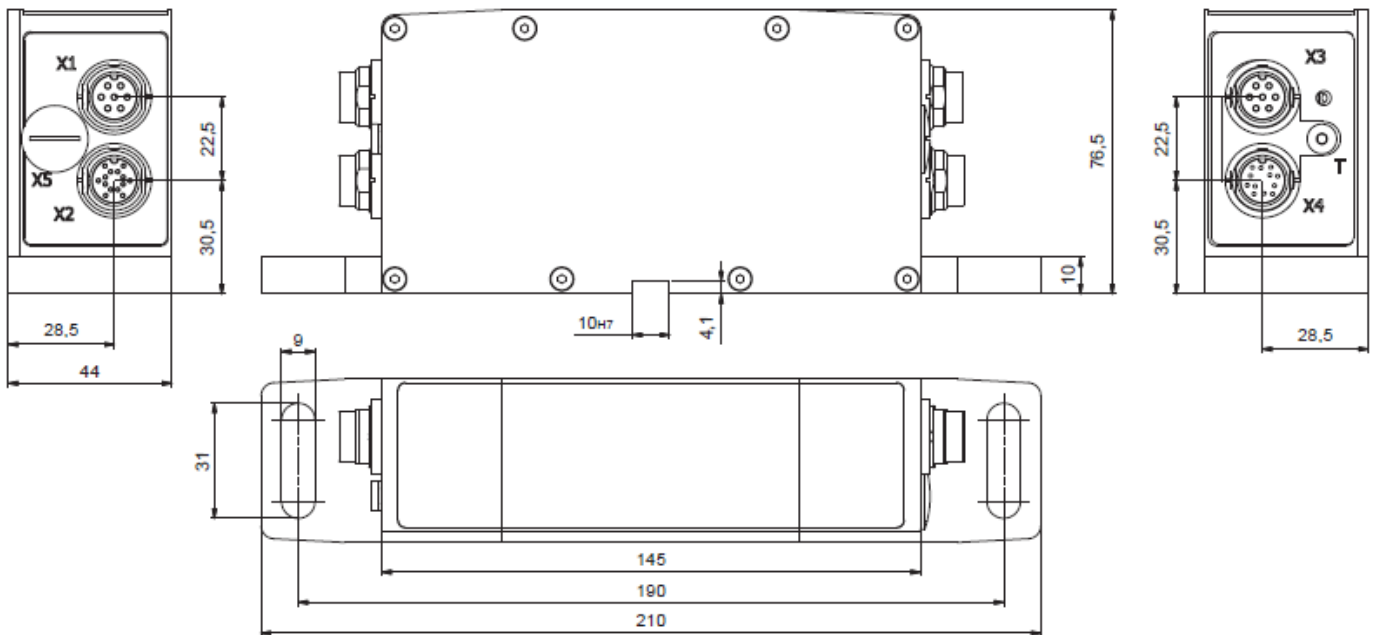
Dimensions of Type 4541A... KiTorq Stator torque evaluation unit (stator) (dimensions in mm)
